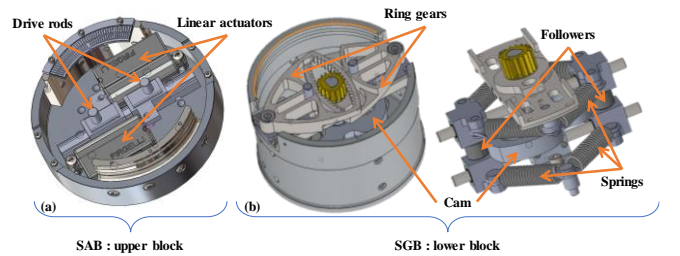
The CAD model of the upper block (a) and lower block (b) of V2SOM.
